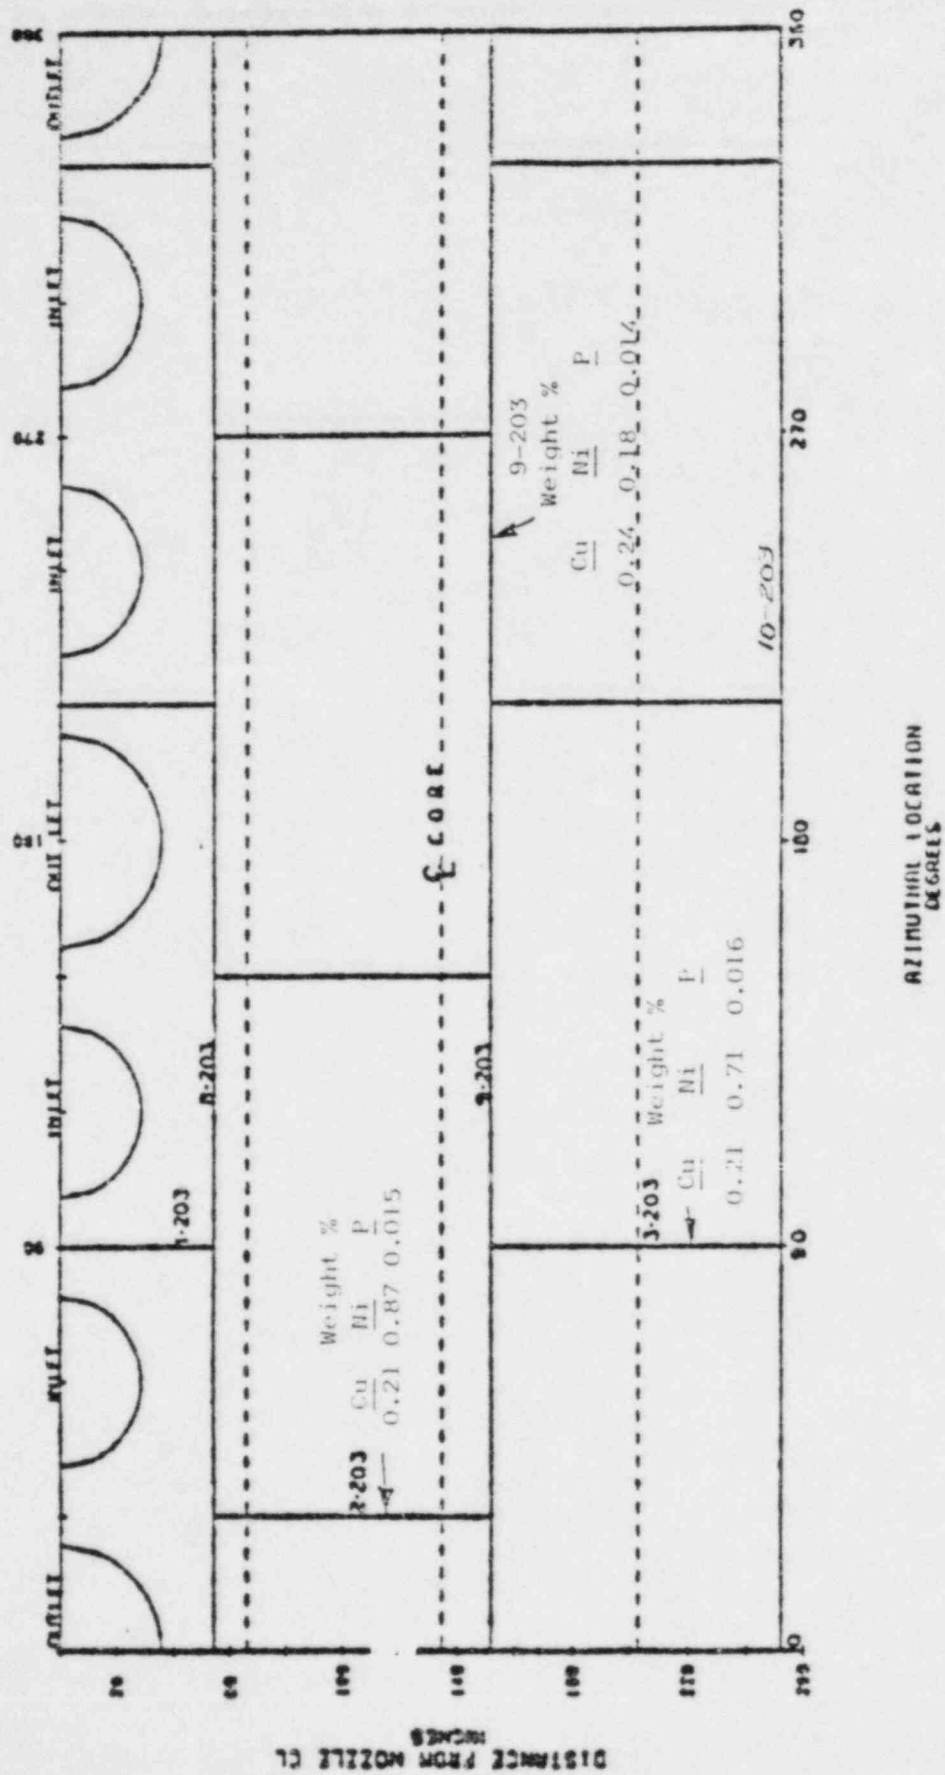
Developed view of inner surface of beltline region of Calvert Cliffs-1 pressure vessel, showing locations of welds.
